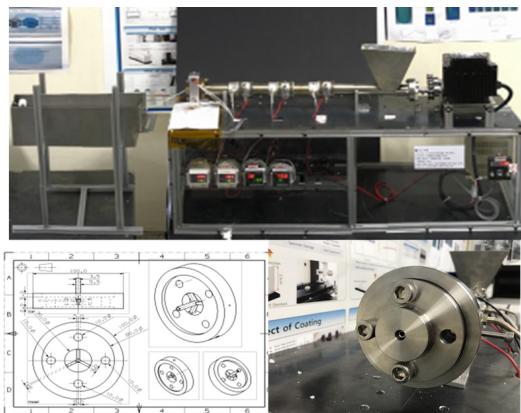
Polymer extruding system and enlarged view of extrusion die.
